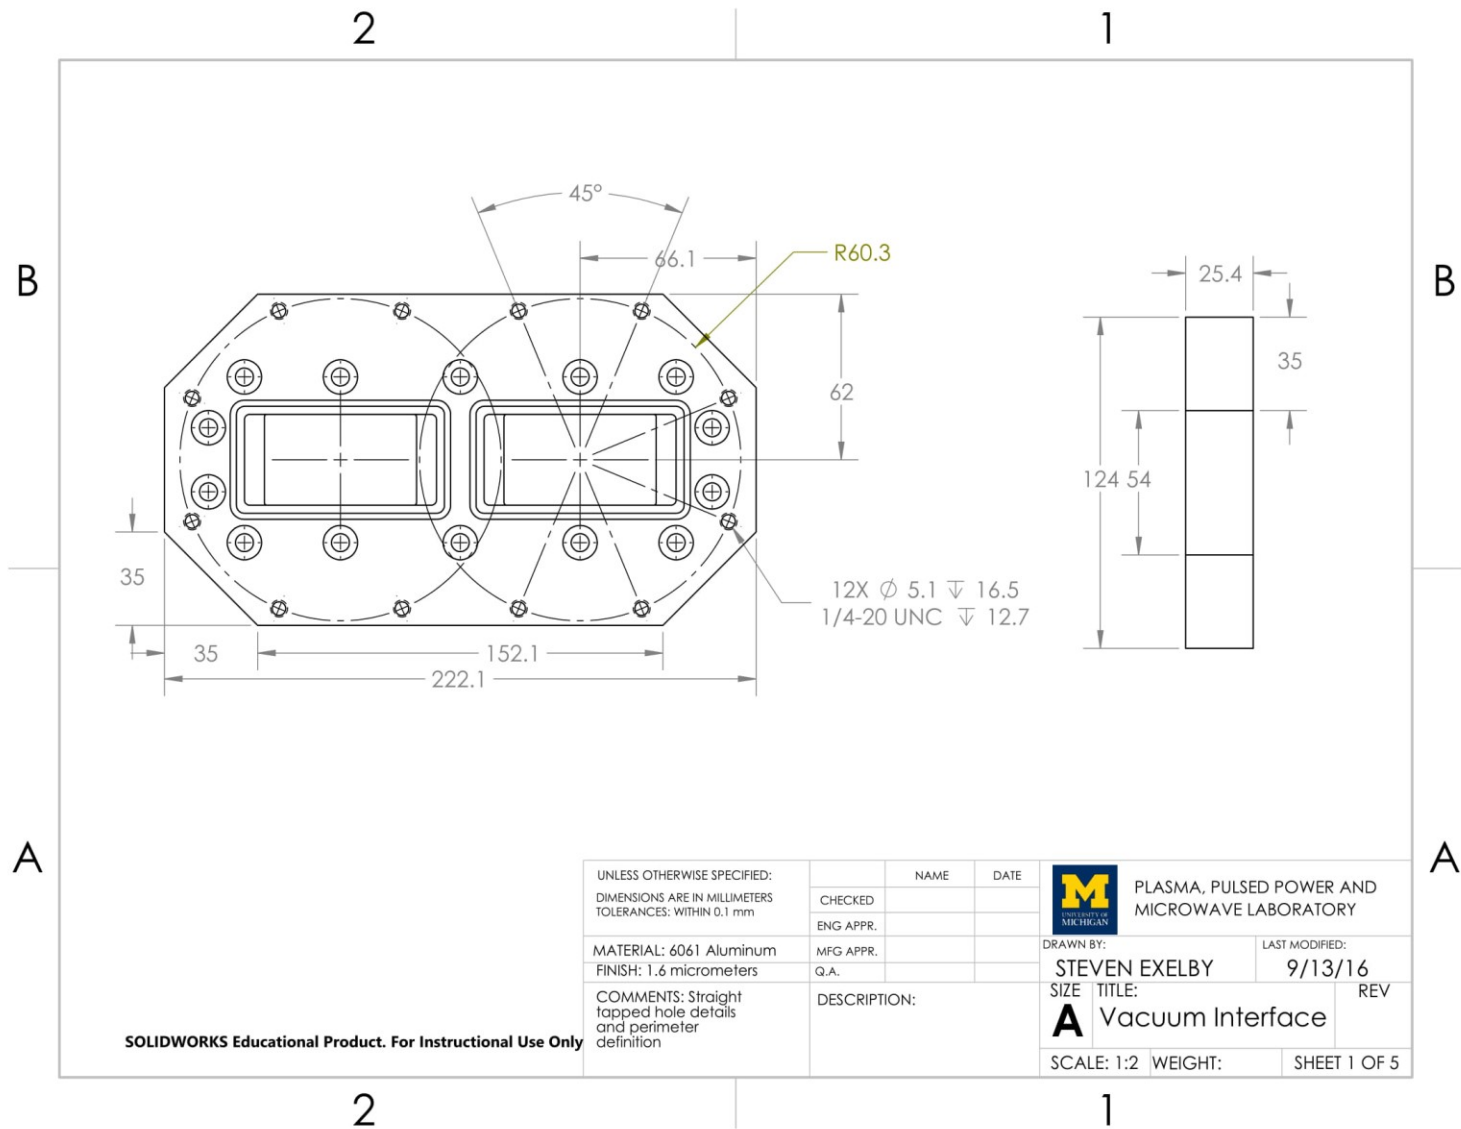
Vacuum interface, a 2mm thick lexan window is mounted between this piece and the endplate to make the vacuum window. Page 1.
